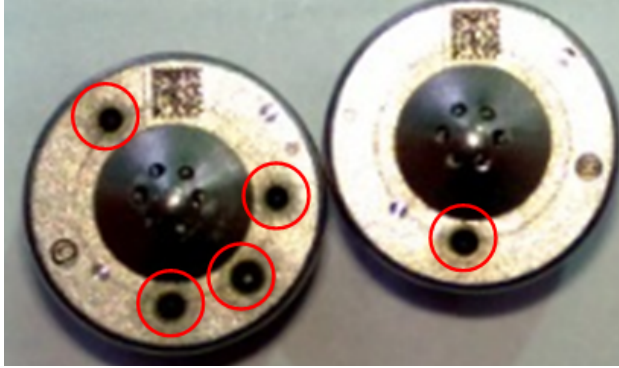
Picture of holes drilled in fuel injectors (chromium- based alloy)
